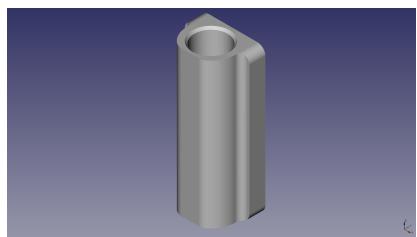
Begonia 3D Printed Double Bearing Holder Render
